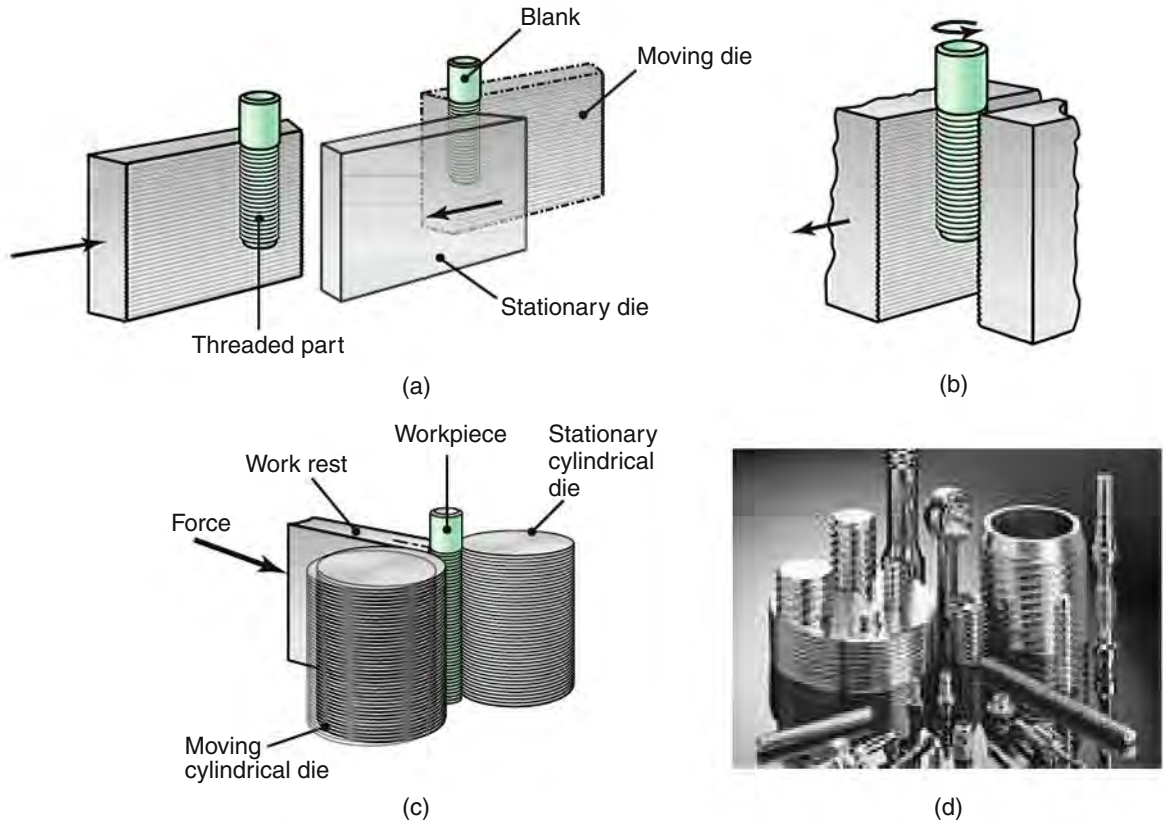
Thread-rolling processes: (a) and (b) reciprocating flat dies; (c) two-roller dies; (d) A collection of thread-rolled parts made economically at high production rates. *Source:* Courtesy of Tesker Manufacturing Corp.
